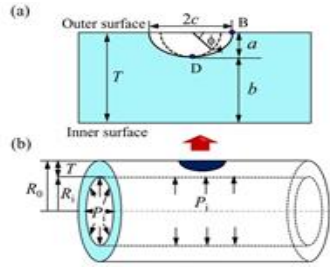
Geometry model of external axial surface crack: (a) the sketch of a semi-elliptical axial surface crack; (b) a vessel containing a semi-elliptical surface crack located on the external surface subjected to uniform internal pressure.
